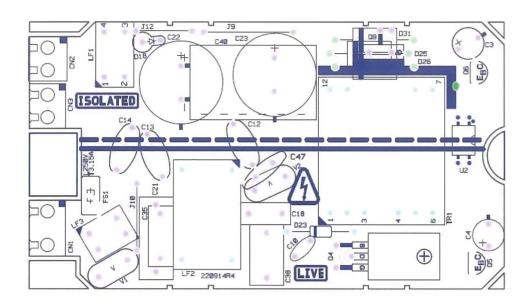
The top of the PCB Layout of the CRM Flyback PFC design
